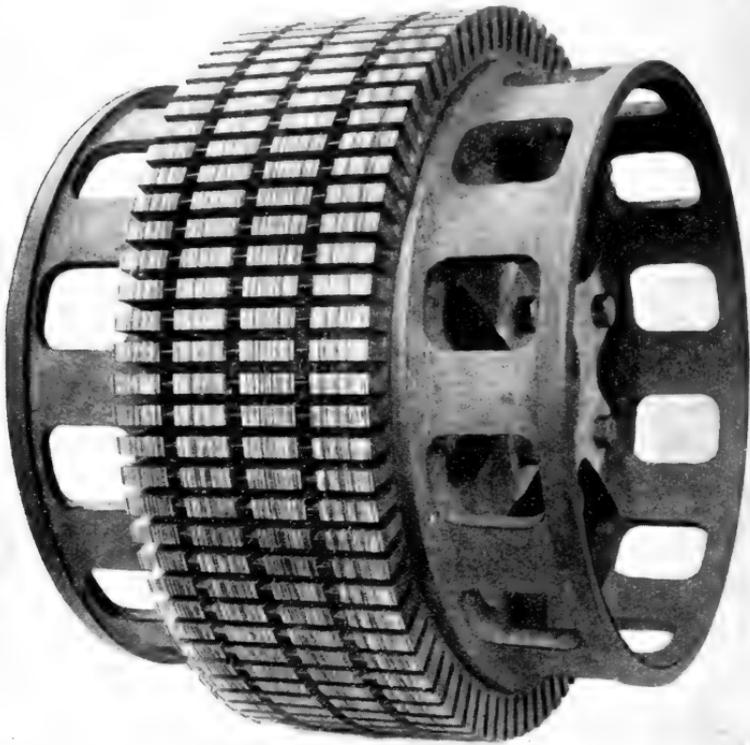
Complete Assembled Core of 120 h.p. Motor. Vickers, Sons & Maxim.
